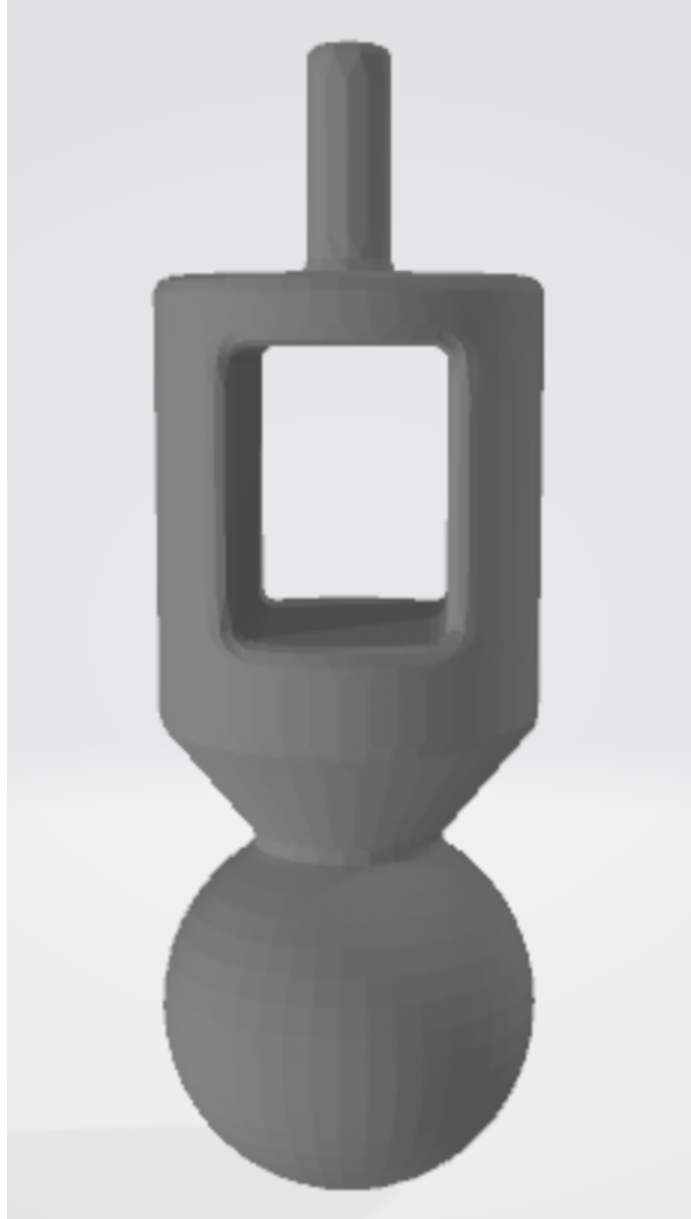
A 3D model of the 3D printed male part of the ball joint.
